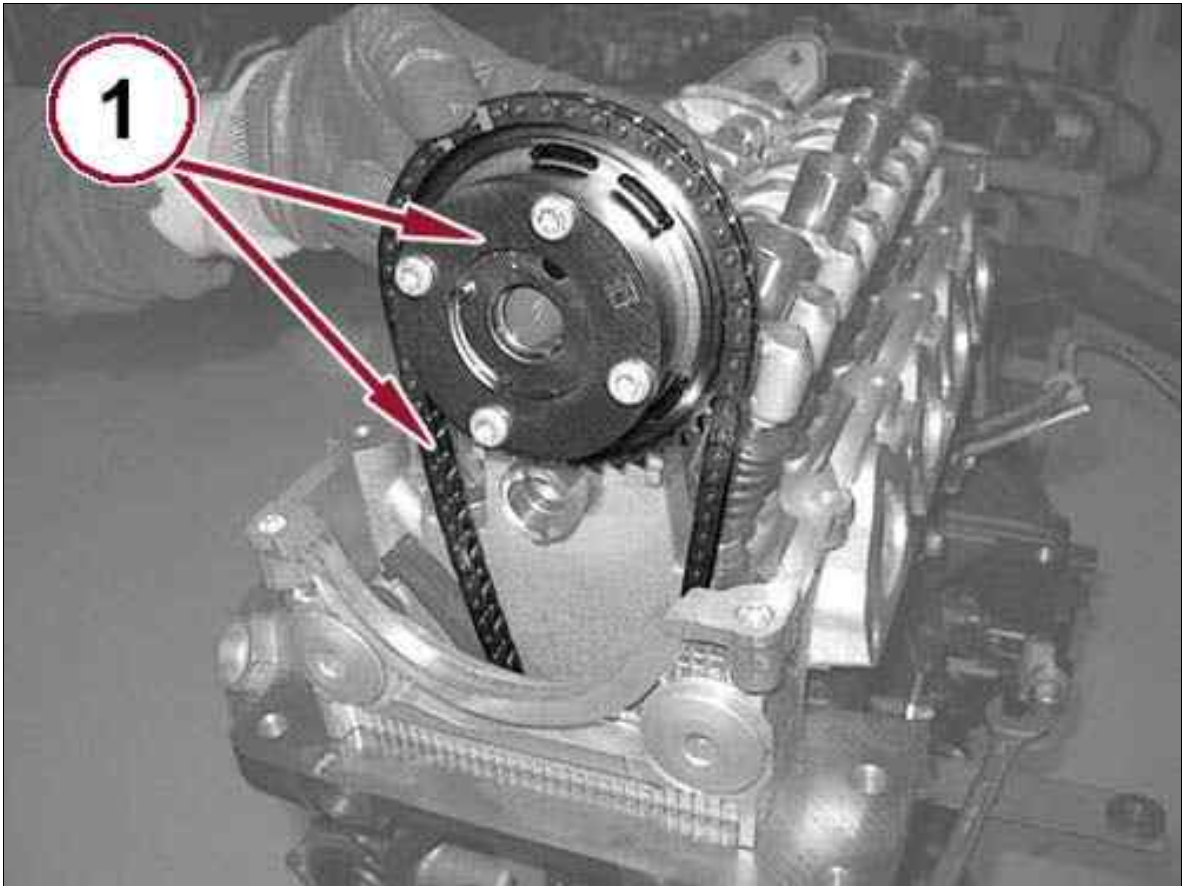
Timing Drive Chain Moving Tensioner & Bolt
